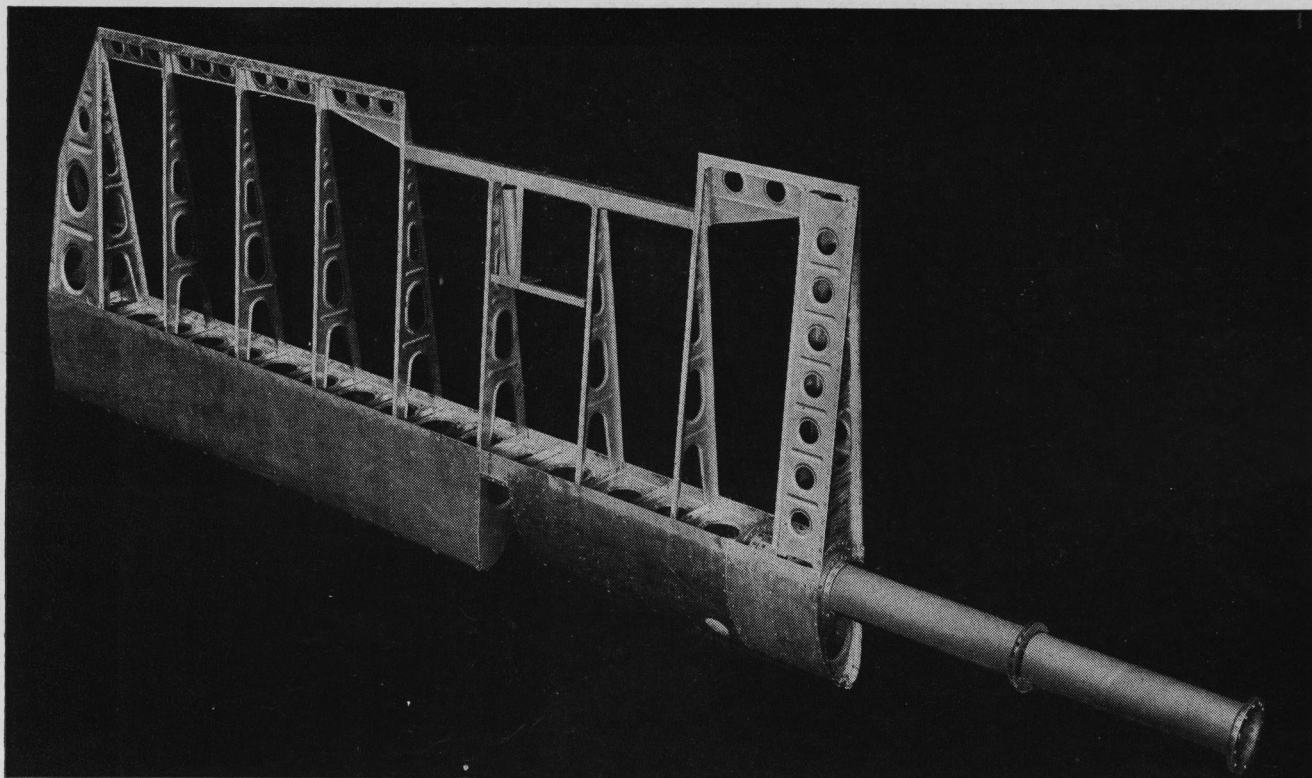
Details of the elevator structure. Torque tubes of the two units are bolted together through a control lock fitting mounted on the stabilizer at the center line of the plane. Hinge bearing supports are aluminum alloy forgings bolted to spars, and elevator movement is limited by stops.
